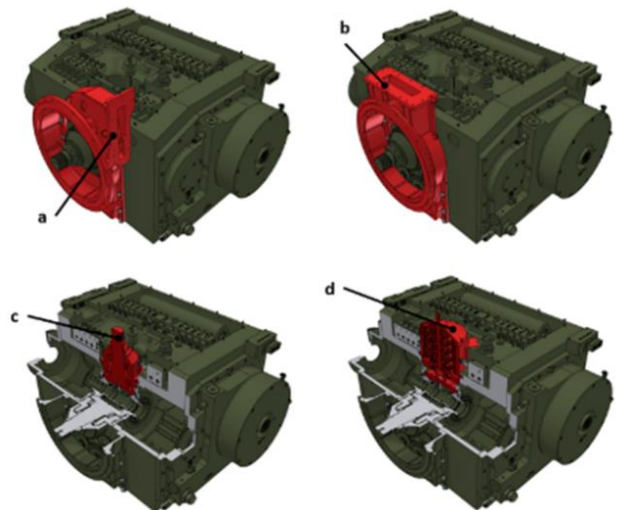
PTO Mounting Options (a. Side mount; b. Top Mount; c. Top bevel driven; d. 8 Speed Drive)
